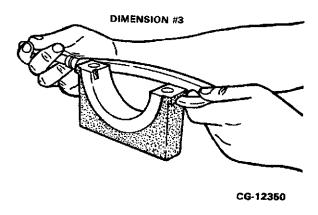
Measure Dimension No. 3 (Bearing Cap Width)
